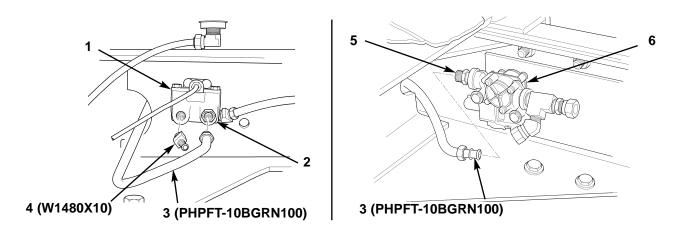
Connecting Tube to Relay Valve and Right-Rear Modulator.
